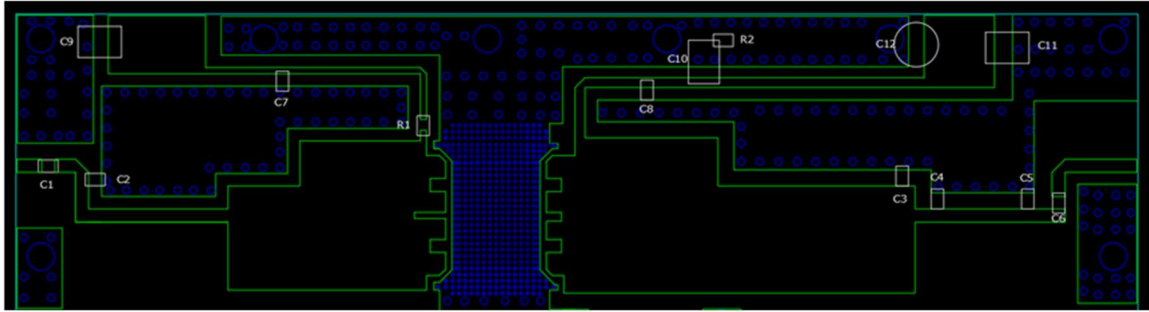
Test Circuit Component Layout, 20mils RO4350B
